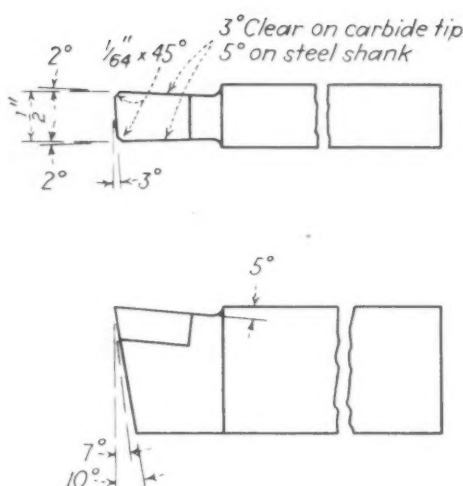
Carbide tipped tool for cutting off open end of shell.
